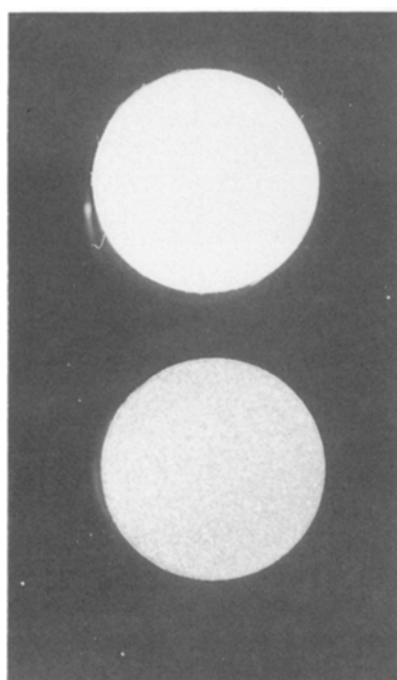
Alumina-coated tensile specimen after failure, showing the failed metal surface (bottom) and the removed coating (top).
